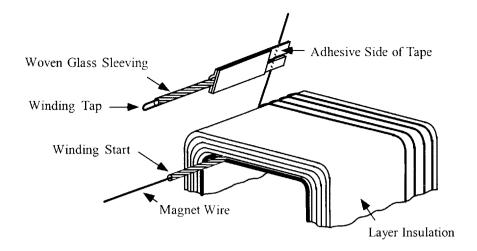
Tap Lead: Step 2, Showing the Compressed View, Using Sleeving.
